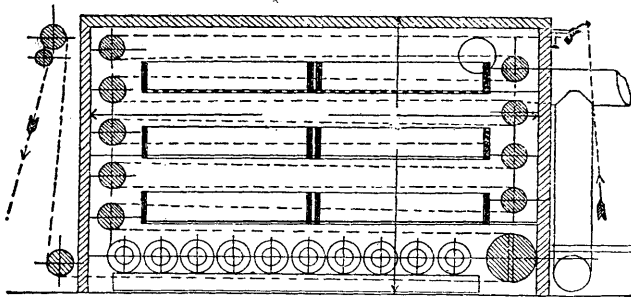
Carbonizing Machine for Wool and Piece Goods.
